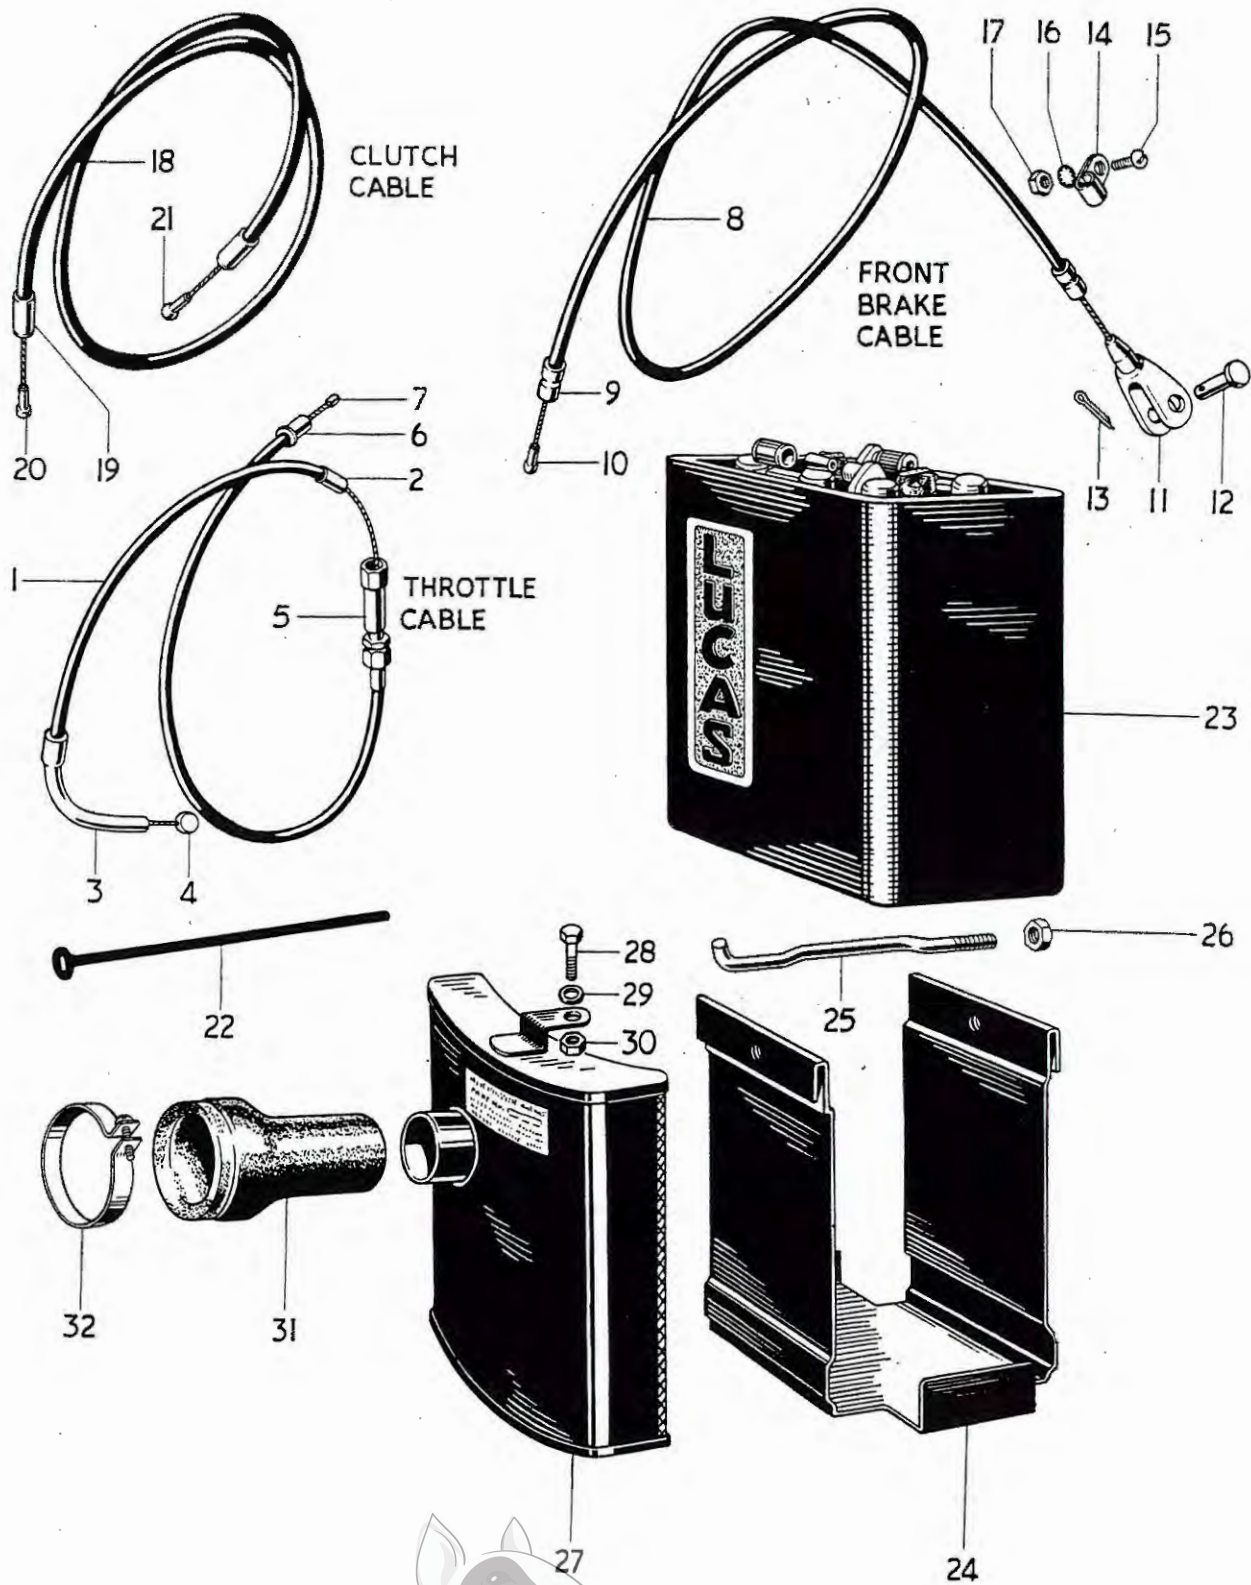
CONTROL CABLES, BATTERY CARRIER AND AIR FILTER.
